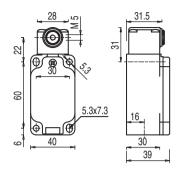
Dimensions of S300-P13C1-M20-CB and S300-P13C1-M12-CB in mm
